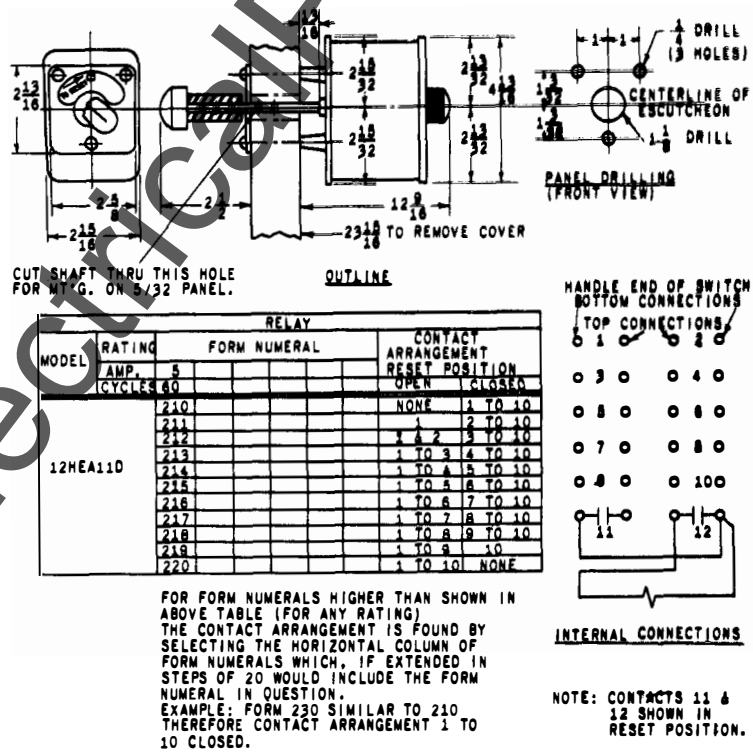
Outline, Panel Drilling And Internal Connections For Type HEA11D Relay
